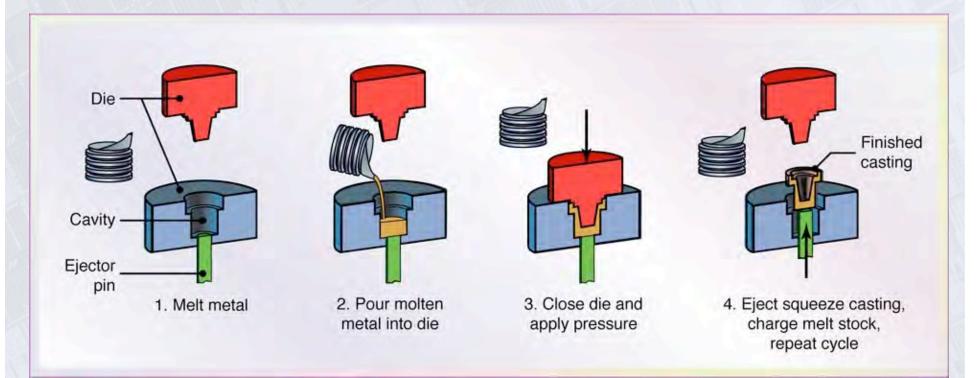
Sequence of operations in the squeeze-casting process. This process combines the advantages of casting and forging.
